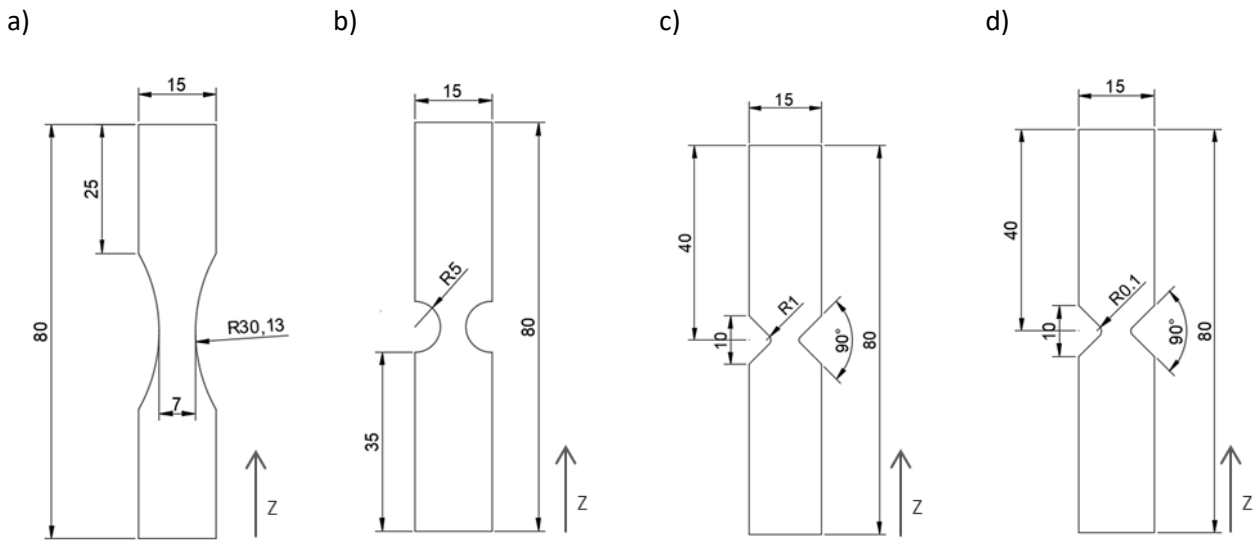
Samples geometries: (a) dog-bone specimen, (b) semi-circular specimen, (c) blunt V-notch specimen with a notch root radius of 1 mm, and (d) blunt V-notch specimen with a notch root radius of 0.1 mm
